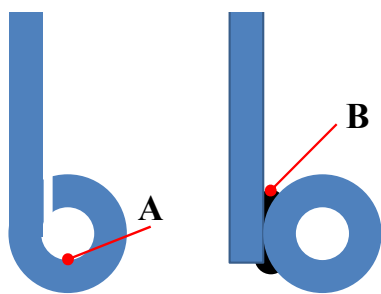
Conventional hinge production processes by folding of a sheet and welding of a pipe into a sheet metal.
